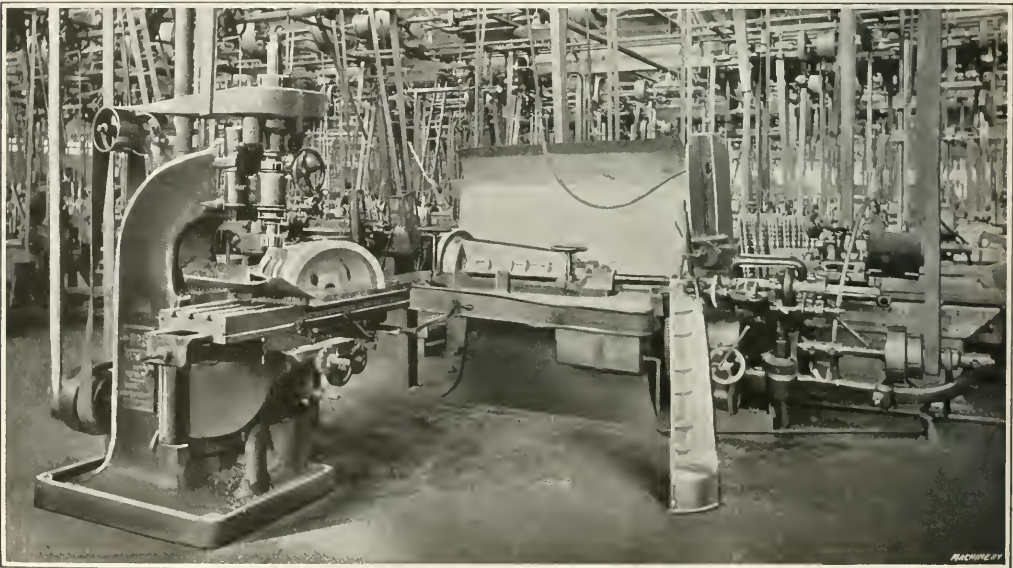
Boring Shaft Bearing and facing off Oil Pump Pad
